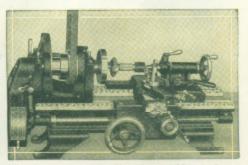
Cutting the Thread on a Master Screw Thread Gauge.
